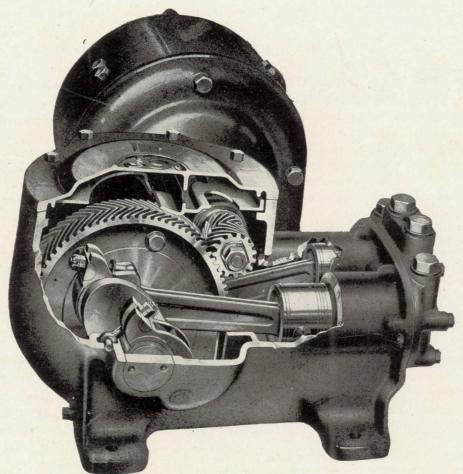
AIR COMPRESSOR SECTION SHOWING MECHANICAL DETAILS
